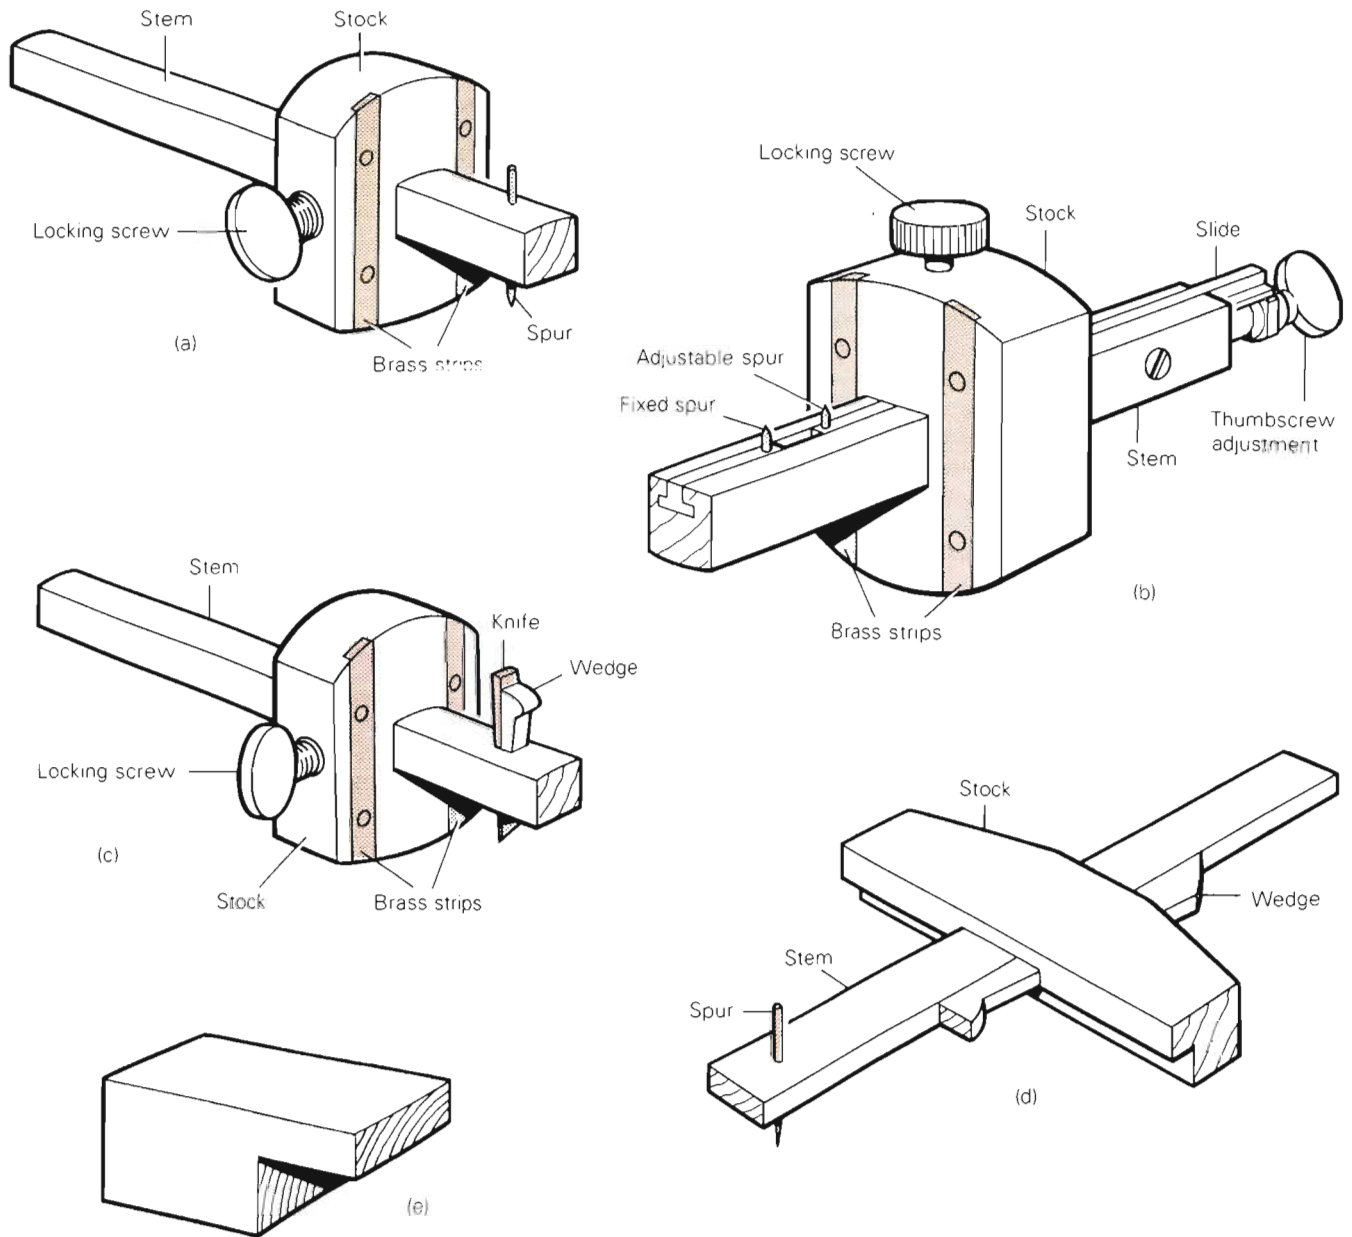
Gauges: (a) marking gauge, (b) mortise gauge, (c) cutting gauge, (d) panel gauge, (e) thumb gauge.
